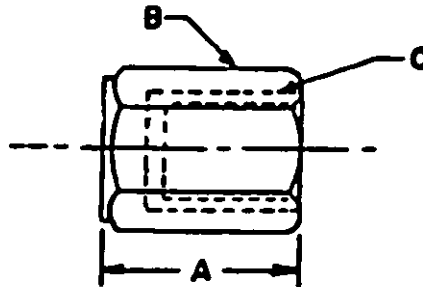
Type XIII, class 5, puller adapter, mechanical gear and bearing, leg cap.
